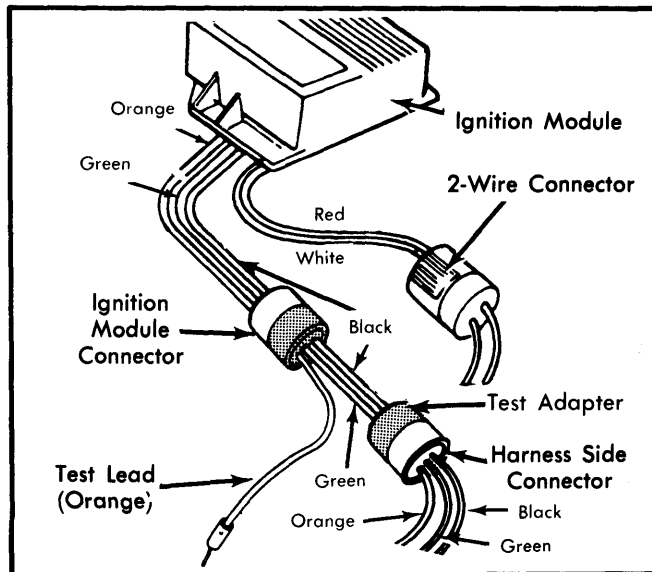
Installation of Test Adapter or Jumper Wires for Performing EEC III Diagnosis
